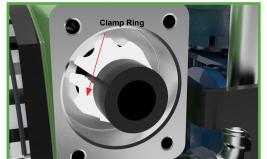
Dura 5, 7, 10 Clamp Ring Inserted
